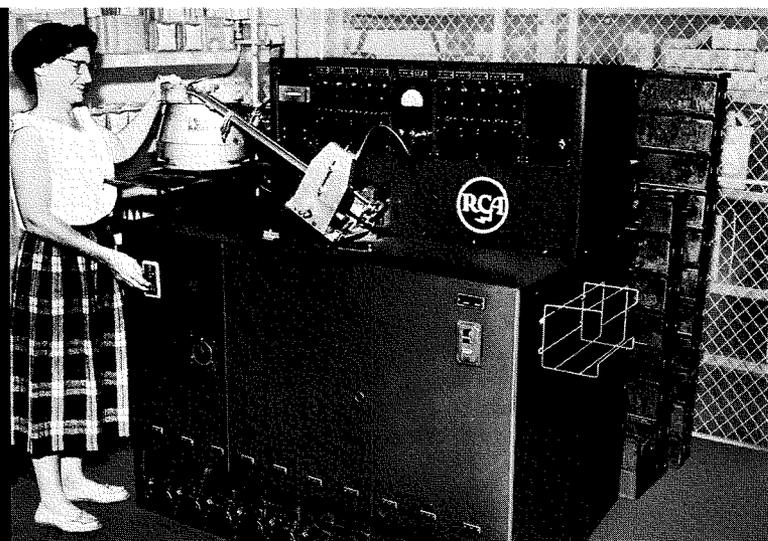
RCA Roller Bearing Inspection Machine at Shafer Bearing Company, Chicago. This unit inspects hour-glass shaped roller bearings at rate of 6000 per hour (as much as 30 inspectors formerly produced in the same period.
